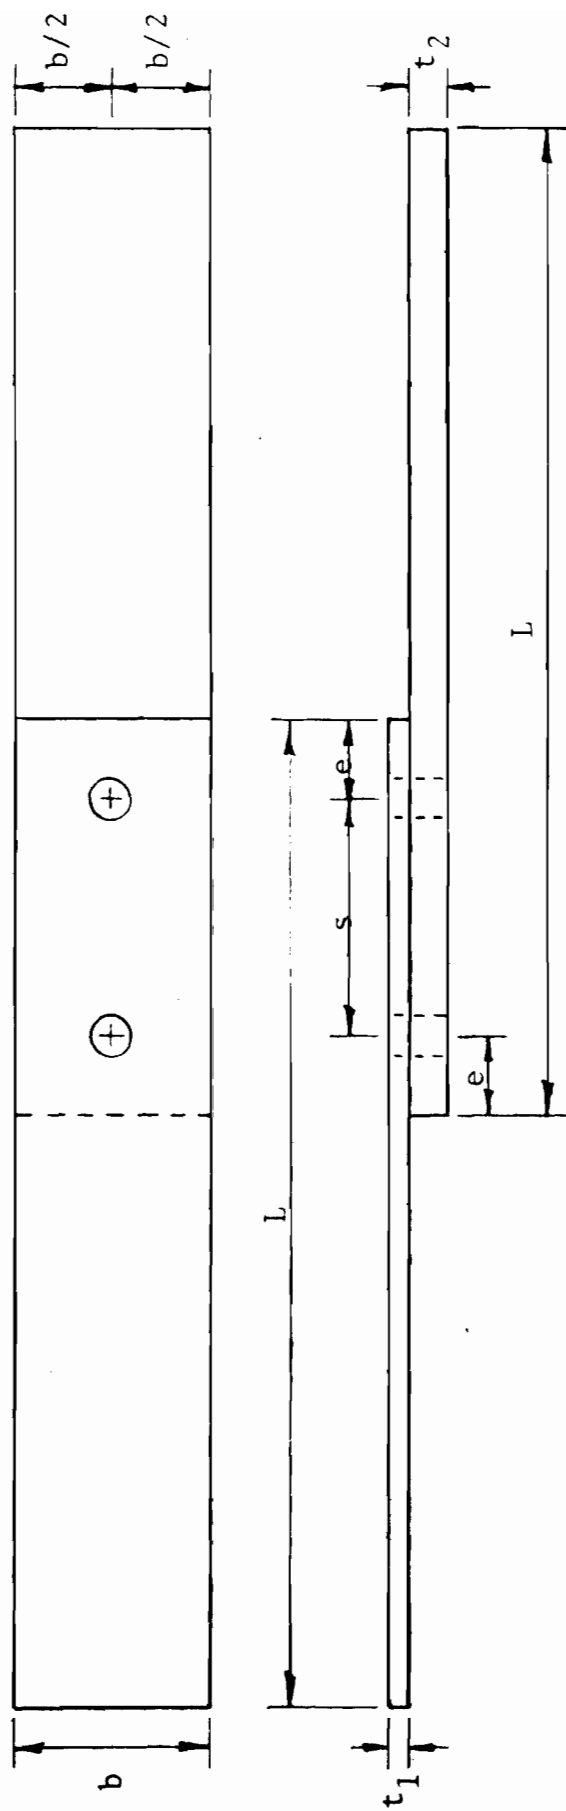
SINGLE-SHEAR (LAP JOINT) TEST SPECIMEN PARAMETERS
